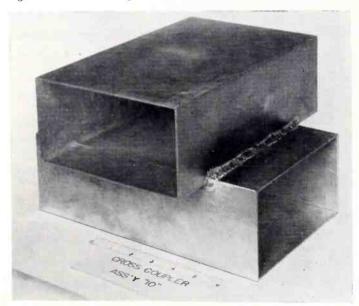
Typical production assembly using the heli-arc butt weld.
